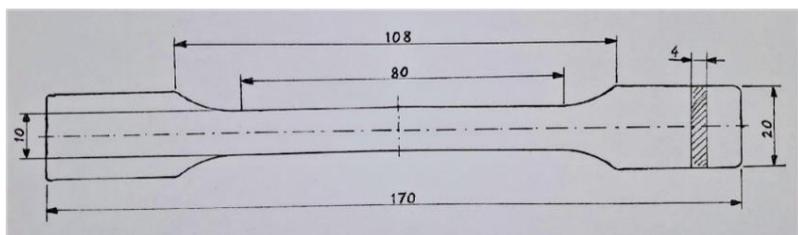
Injection moulded dog-bone shaped test specimen according to ISO 527-2:1993) used for material testing. Dimensions are in millimetres.
